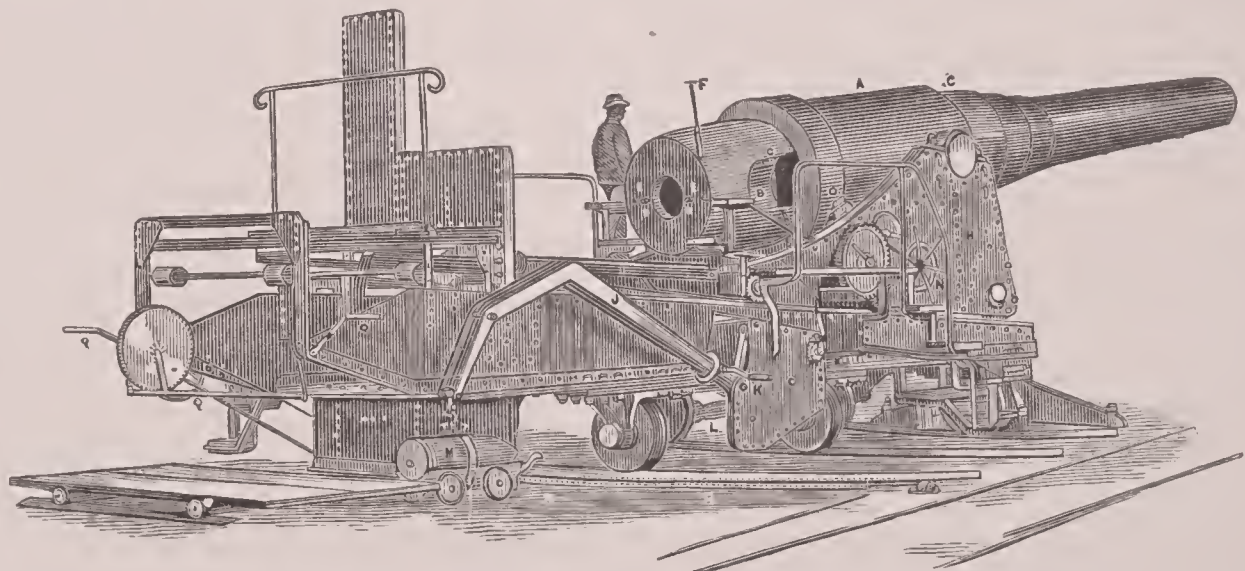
16-inch (71 tons) Krupp gun, mounted on coast-carriage.
